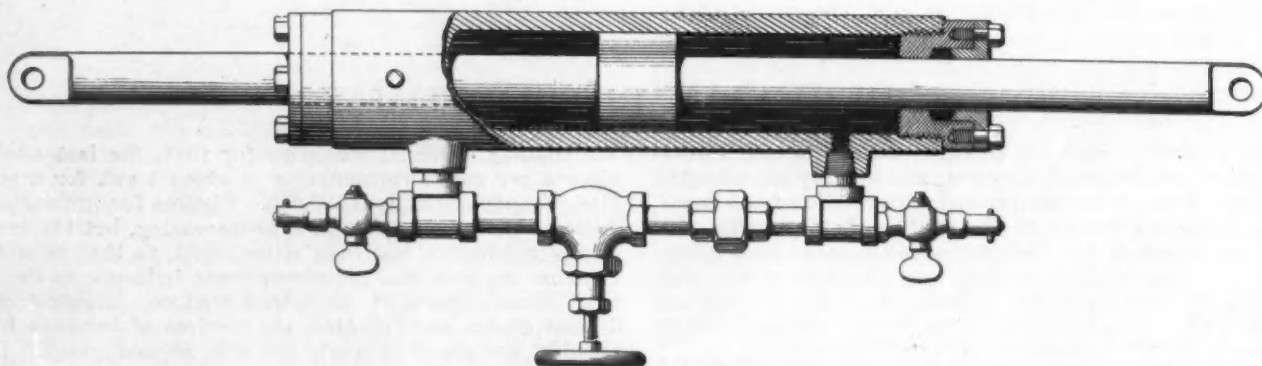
ORIGINAL TYPE OF DAMPER TESTED
